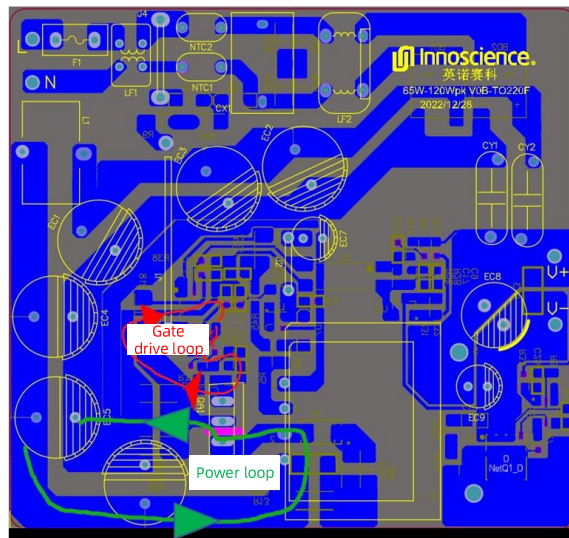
Layout for TO-220 packaged GaN on single-side PCB
